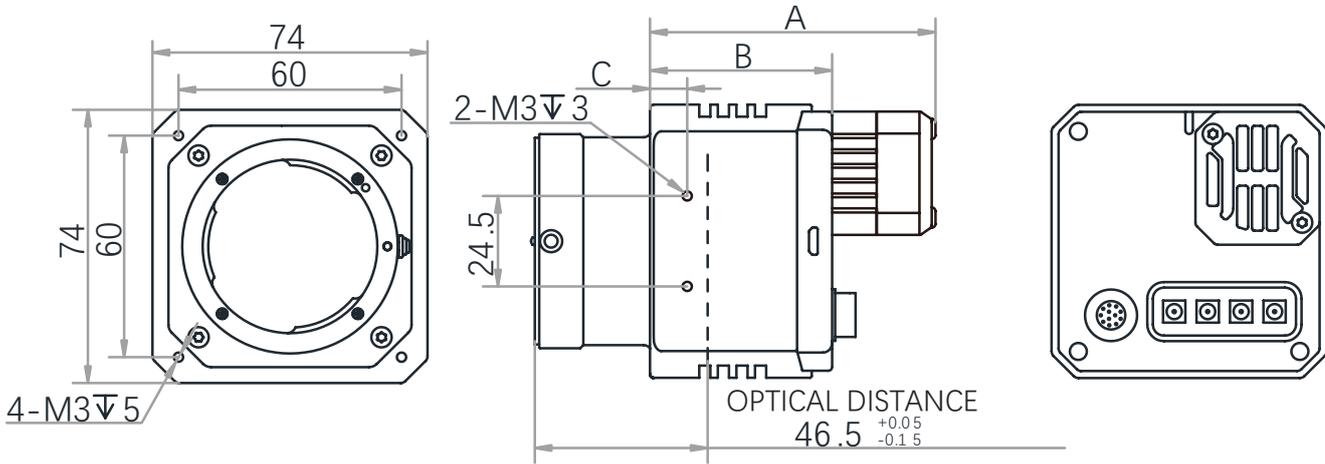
74 * 74 * A mm mechanical dimensions of the CoaXPress camera with F-Mount, which adopts M3 specification screws.
